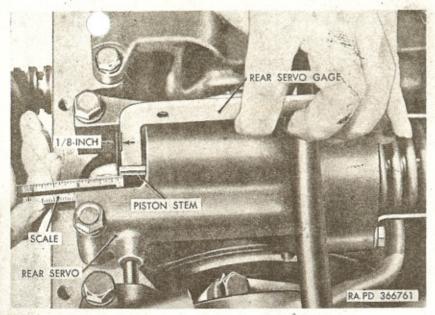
Checking rear band adjustment, using rear servo gage— B7950329.
